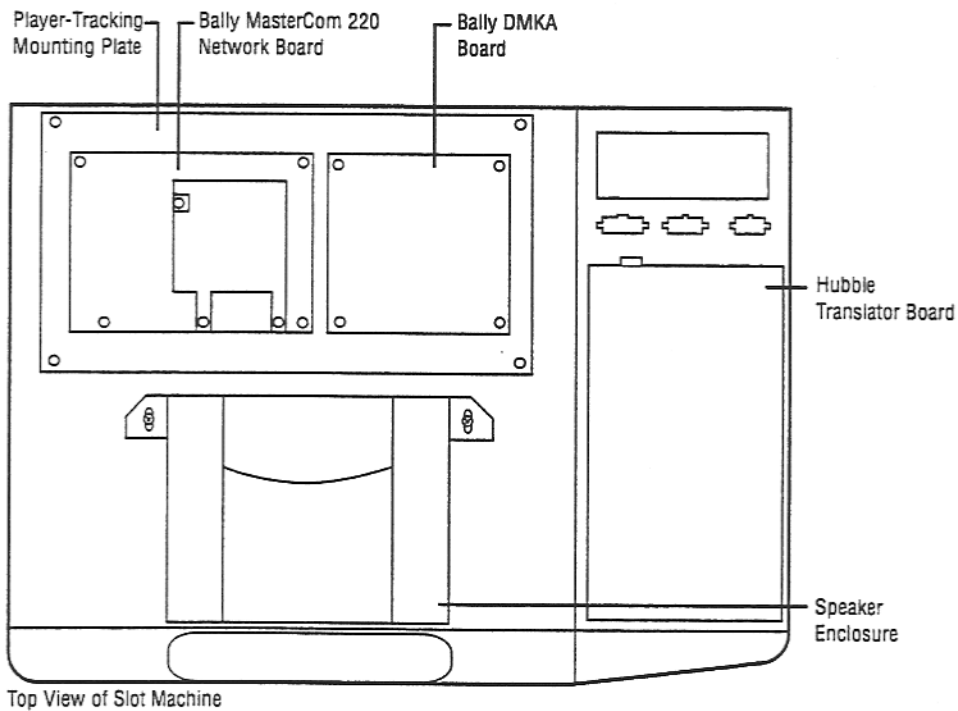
shows the top of the machine with a Bally interface board installed.
